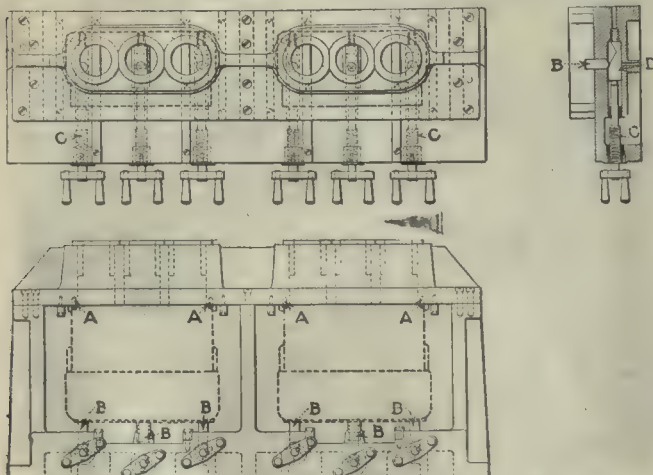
FIXTURE FOR BORING PUSH-ROD HOLES
